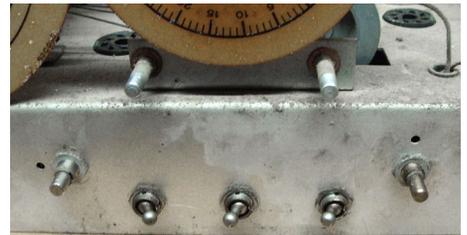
Surprise! With removal of panel/cabinet, we could see that each switch had an extra lock nut on the chassis front apron.
